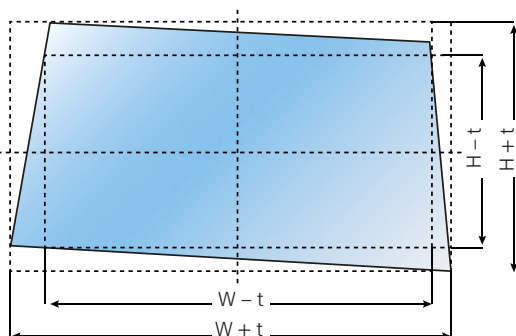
Maximum dimensional tolerances for dimensions of rectangular panes
